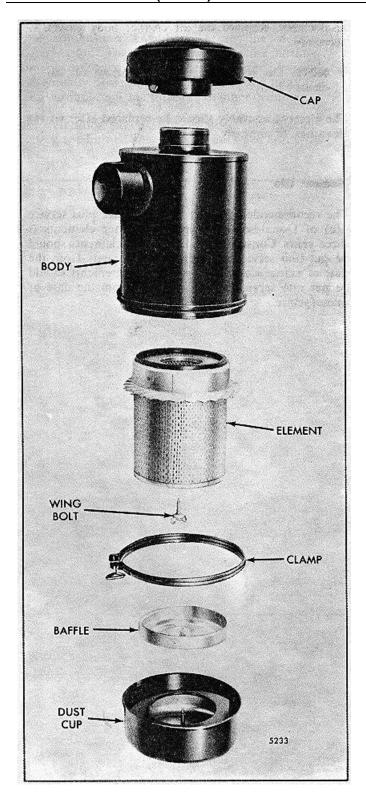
Dry Type Air Cleaner (Heavy Duty)
